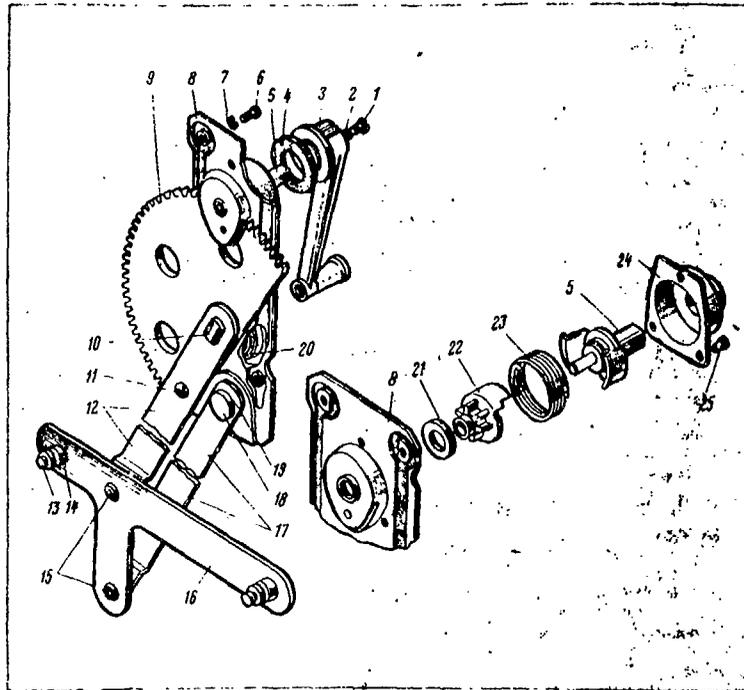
Roll-up Window Mechanism of ZIL-157K: 1 and 6, screws; 2, 7 and 19, washers; 3, handle; 4, sealing ring; 5, drive shaft; 8, window lifting mechanism; 9, window lifting sector; 10, sector axis; 11 and 25, rivets; 12, driving lever; 13, roller axis; 14, roller; 15, lever pins; 16, T-shaped lever; 17, driven lever; 18, lever adjusting screw (adjustment axis); 20, window spring; 21, flat washer; 22, brake mechanism gear; 23, spring; 24, brake mechanism body
